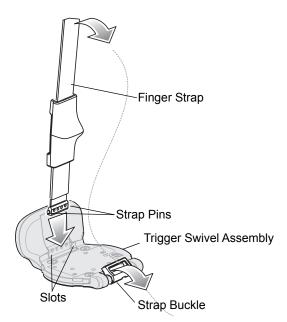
Finger Strap Replacement (Trigger Swivel Assembly)
